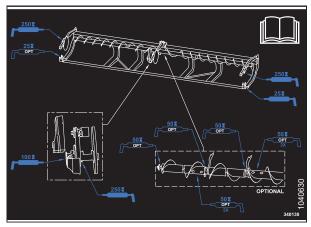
Decal for Double-Knife Header with Three-Piece Upper Cross Auger
